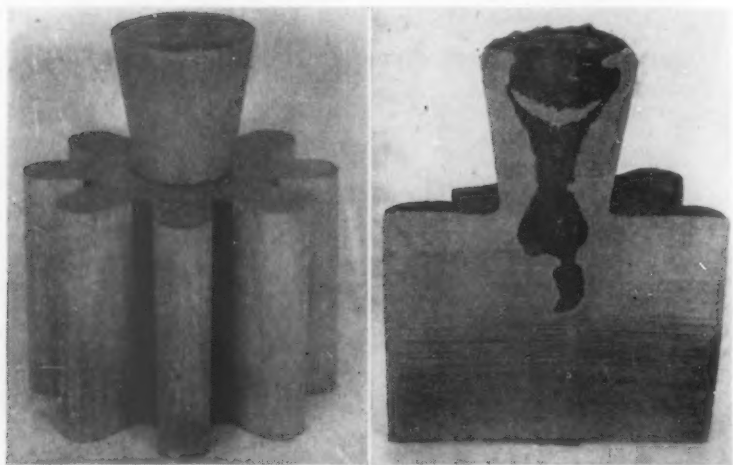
LEFT—PATTERN NO. 8—MODIFIED DESIGN OF PATTERN NO. 3 TO PERMIT CASTING TO SHRINK AWAY FROM SAND READILY, PROVIDE MORE EFFICIENT REMOVAL OF HEAT FROM CASTING AND LOWER AMOUNT OF METAL REQUIRED PER SPECIMEN BLANK. FIG. 15—RIGHT—PATTERN NO. 8—VIEW OF SECTIONED CASTING.
